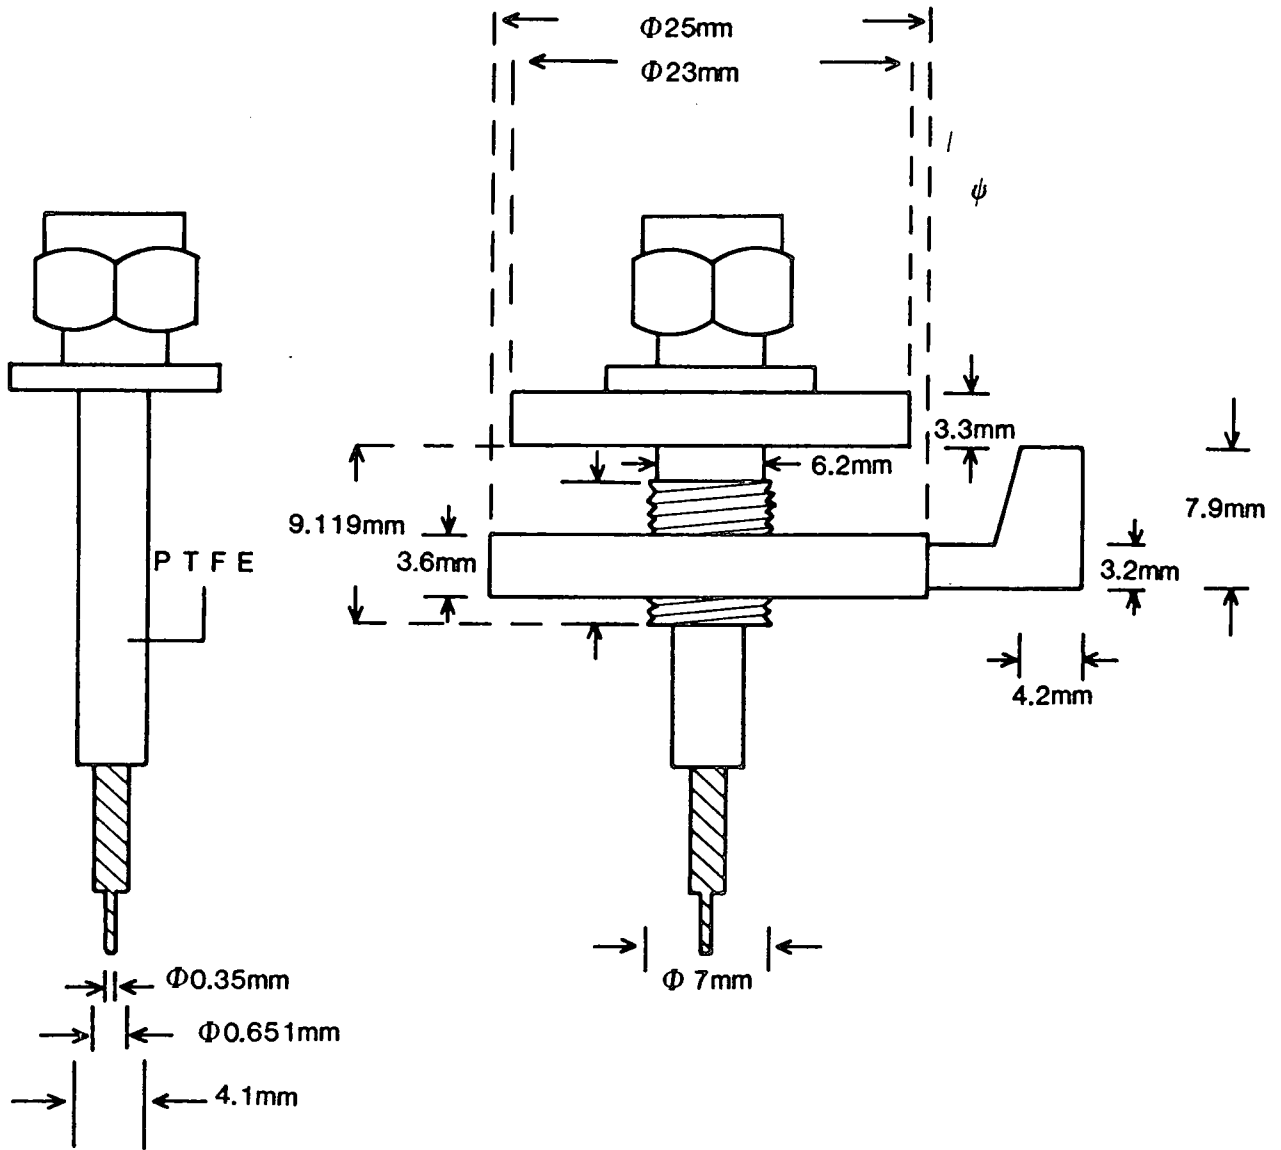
(a) Outline of Probe (b) The Probe Depth Adjustor Mechanism.
